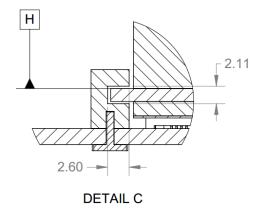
Small Form Factor Baseboard Chassis CTF Dimensions (Rail Guide Detail) - Detail C
